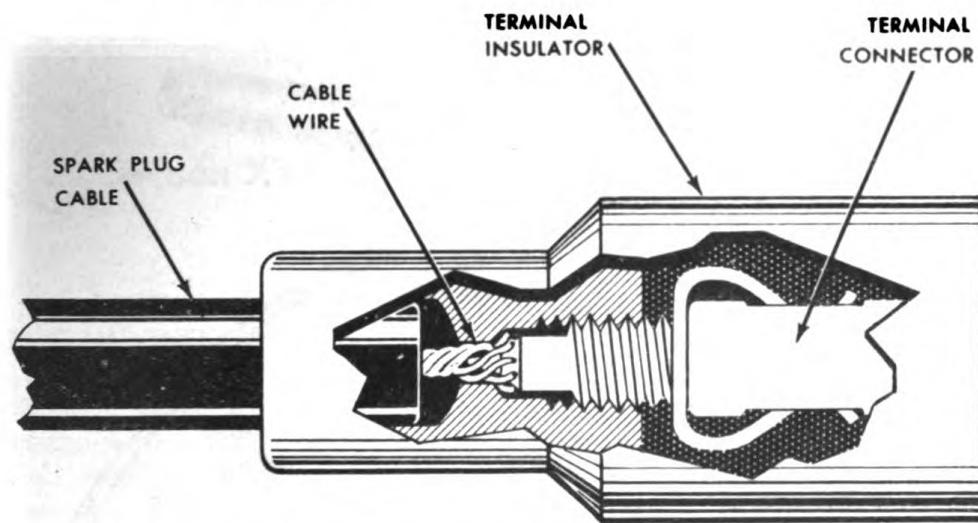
Section of spark plug cable terminal showing connection to cable wire.
